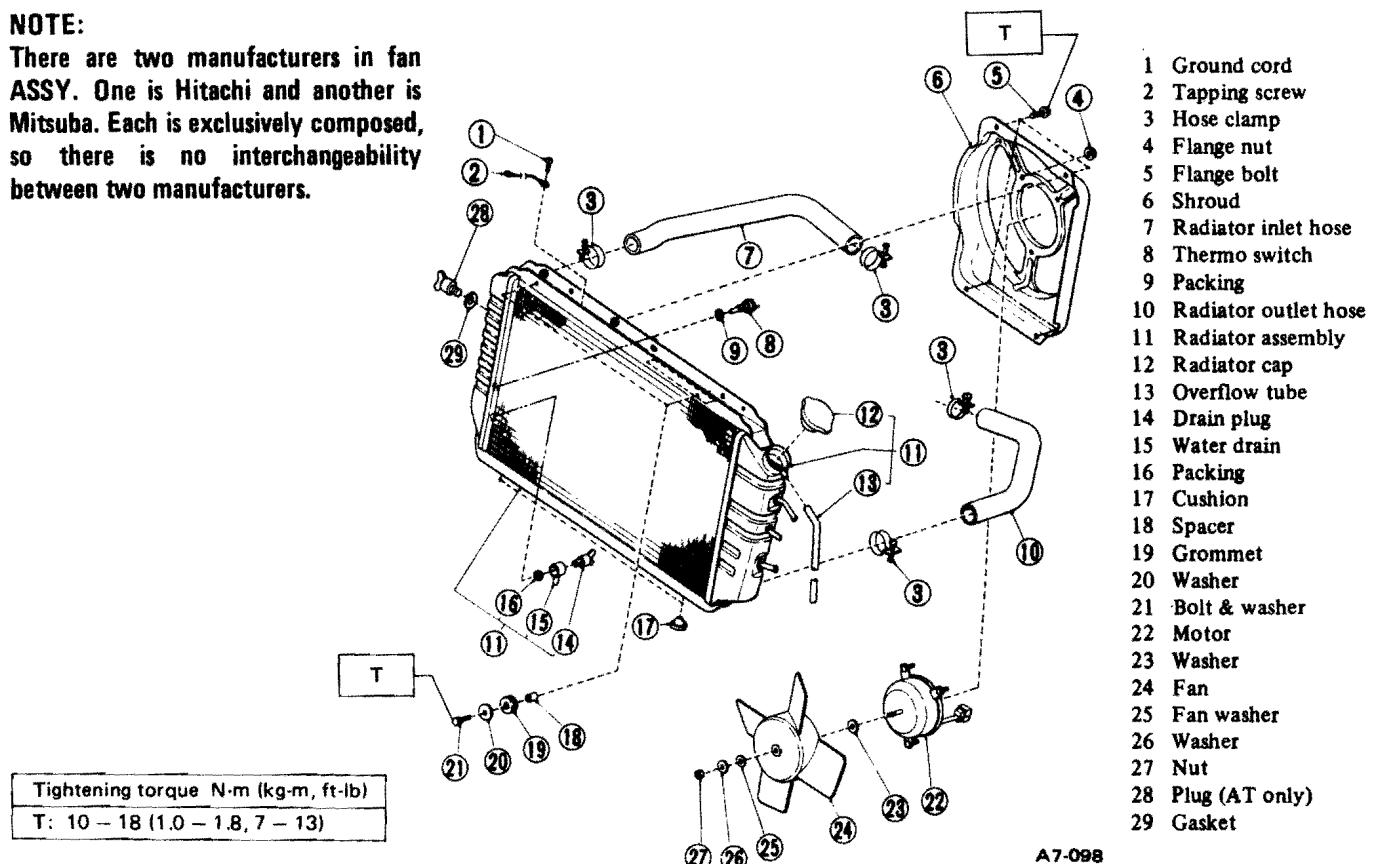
Engine cooling system (Radiator ASSY and electric fan)
